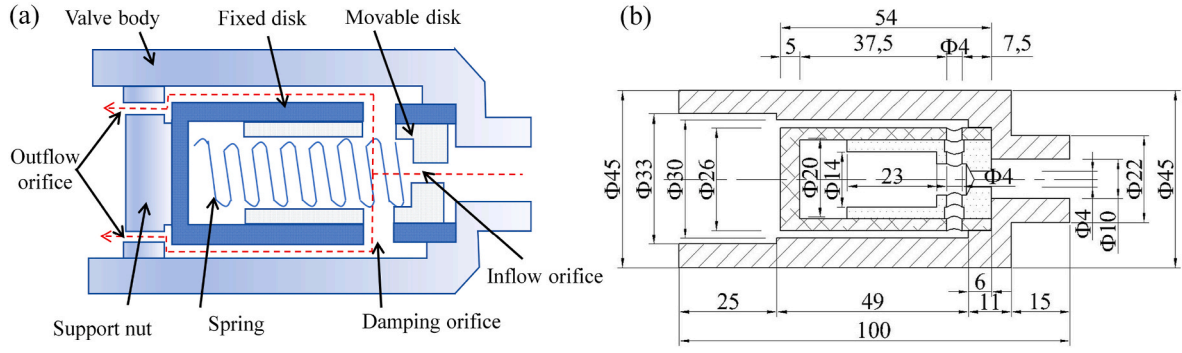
Schematic and dimension of damping valve: (a) schematic; (b) dimension.
